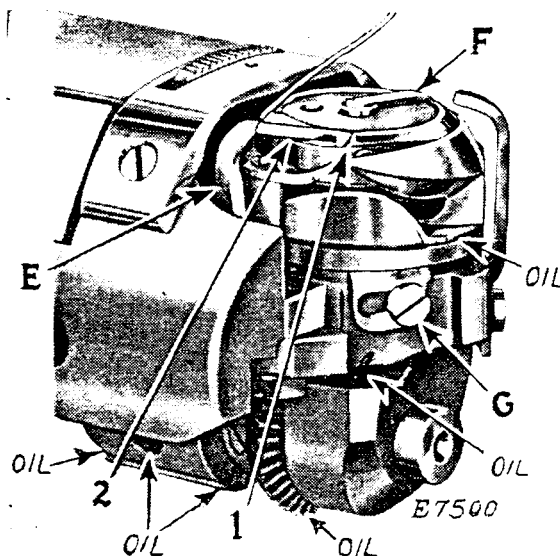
Bobbin Case of Class 49w Machine Threaded Also Showing Adjustment of Mechanical Opener
